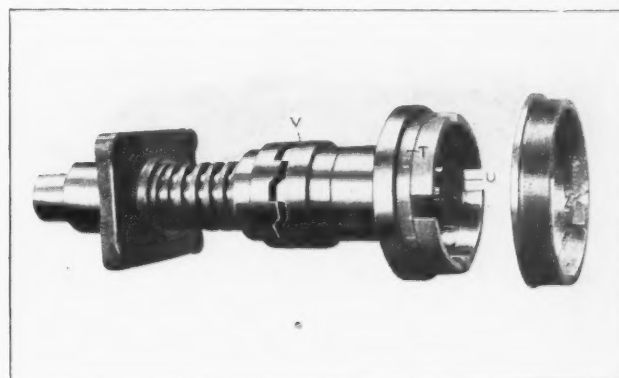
Type of Tool employed for screwing the Seat Ring into Place in the Valve
